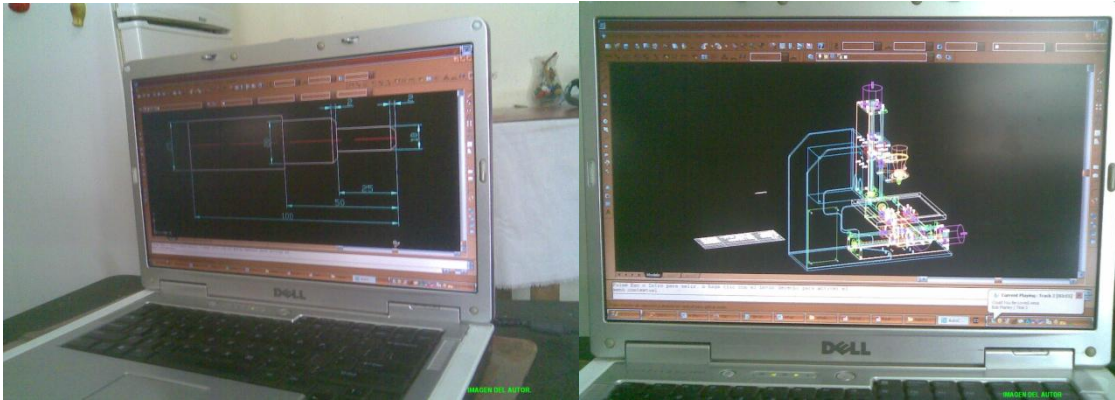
(d) A workpart drawing in AutoCad (e) A 3D part assembly
